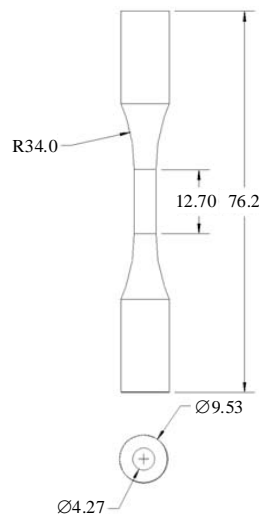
Drawing of the test specimen used in this project (dimensions in mm).
